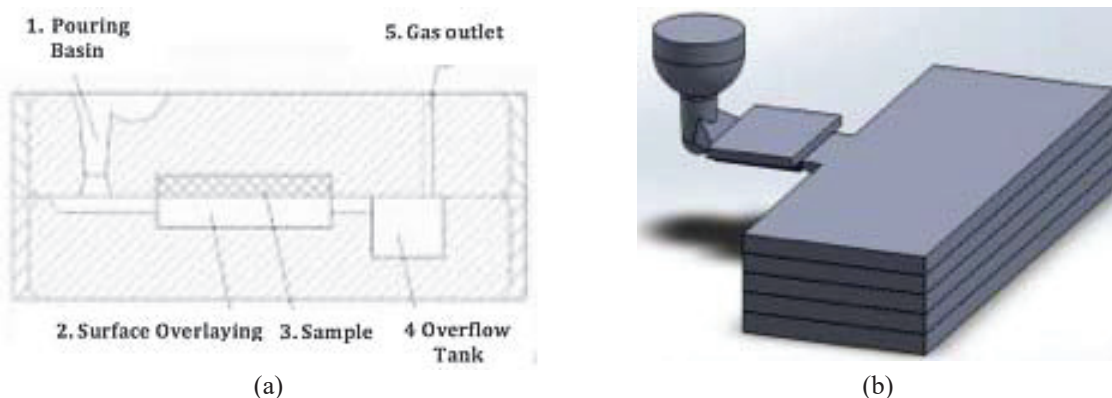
(a) Casting Design and (b) Technical Drawing
